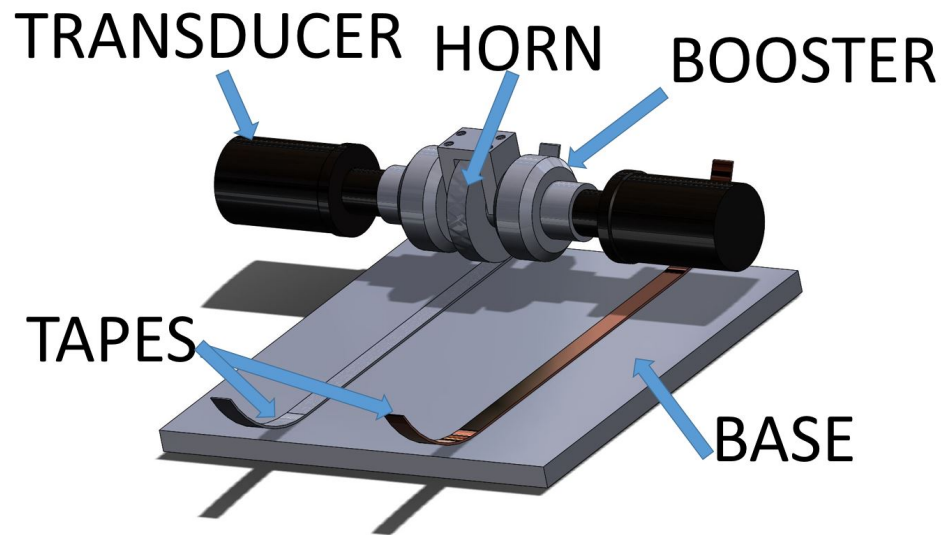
Graphic showing the 9 kW Fabrisonic UAM weld assembly.
